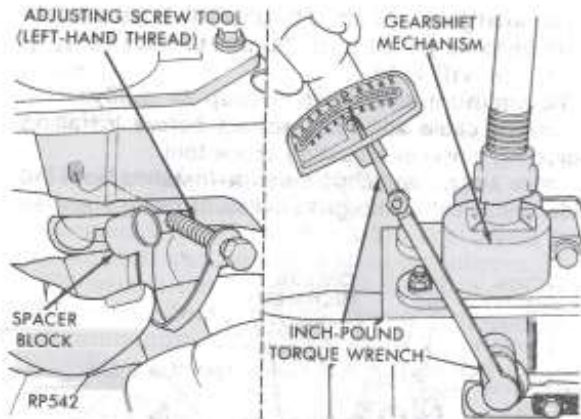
Install Adjusting Screw Tool with Spacer Block (G,J-Bodies)
